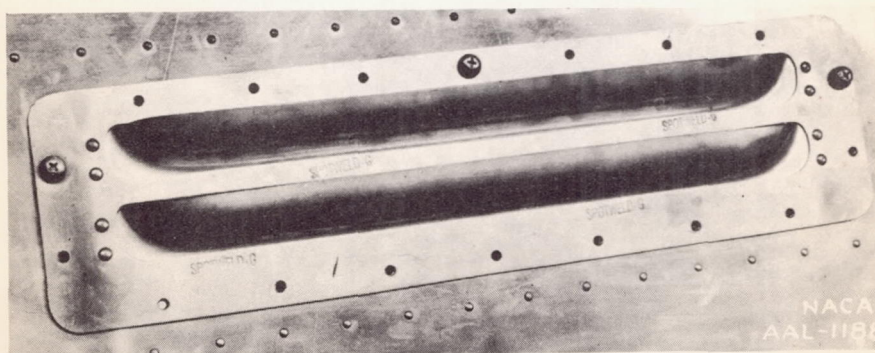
Air outlet louvers, located on the upper wing surface. Two were employed on each wing, each located about 5 inches ahead of the rear wing beam.
